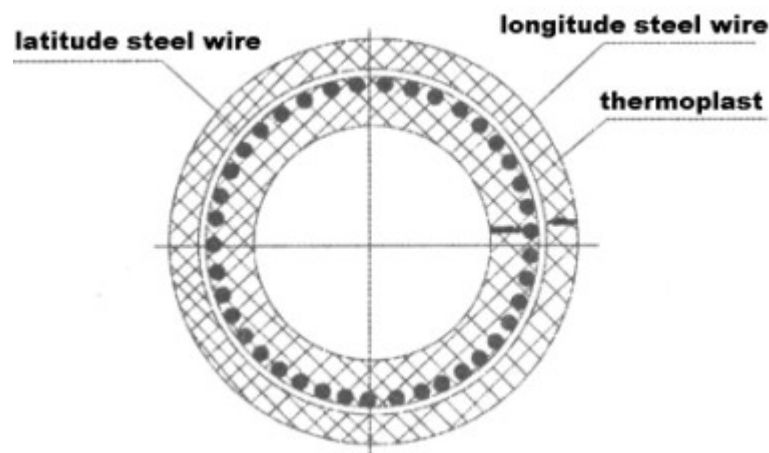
section drawing of Steel mesh reinforced PE pipe and fitting
